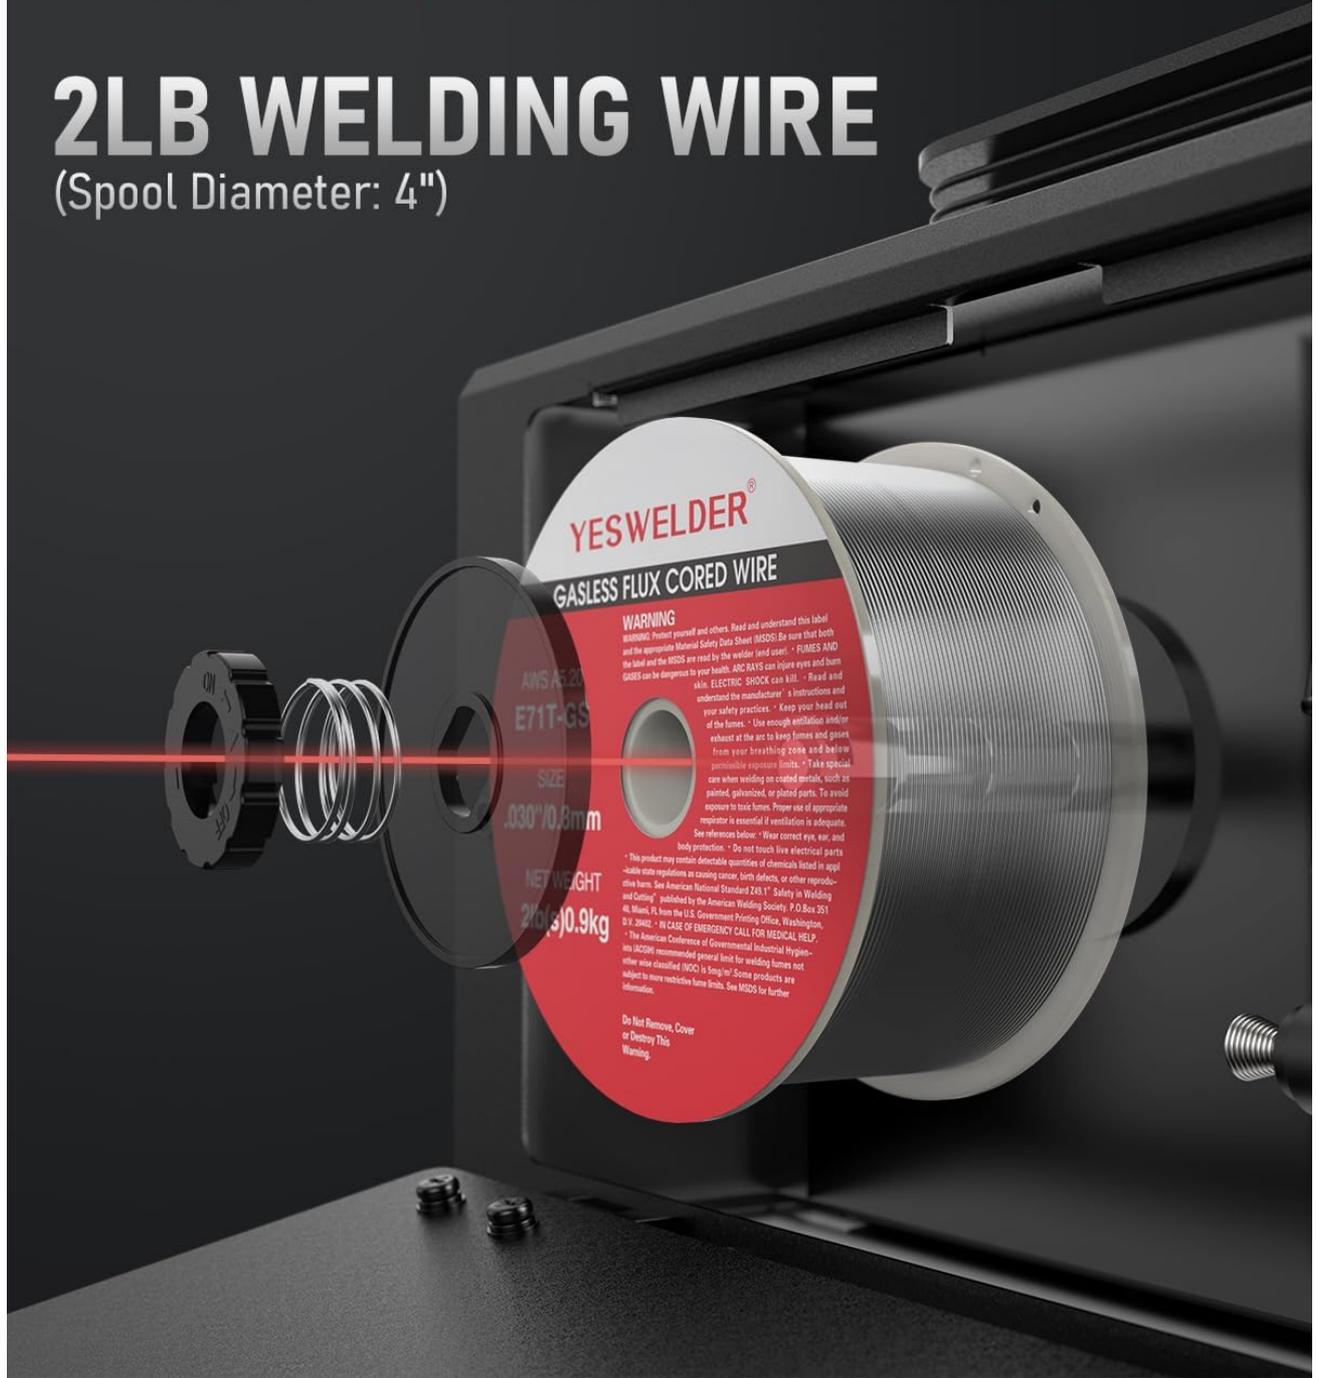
Installation of a 2LB gasless flux cored welding wire spool.
